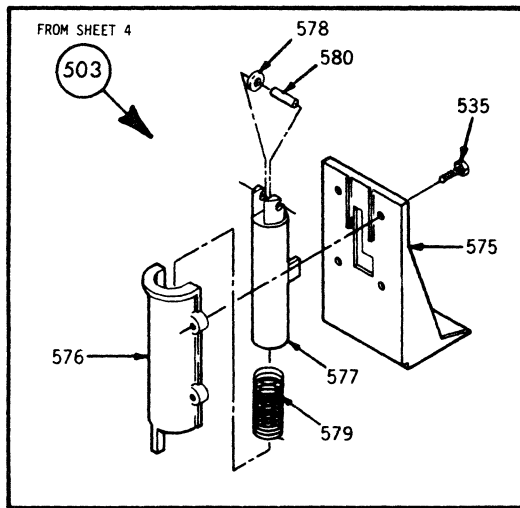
TOP MECHANICAL ASSEMBLY (SHEET 1 OF 2)
